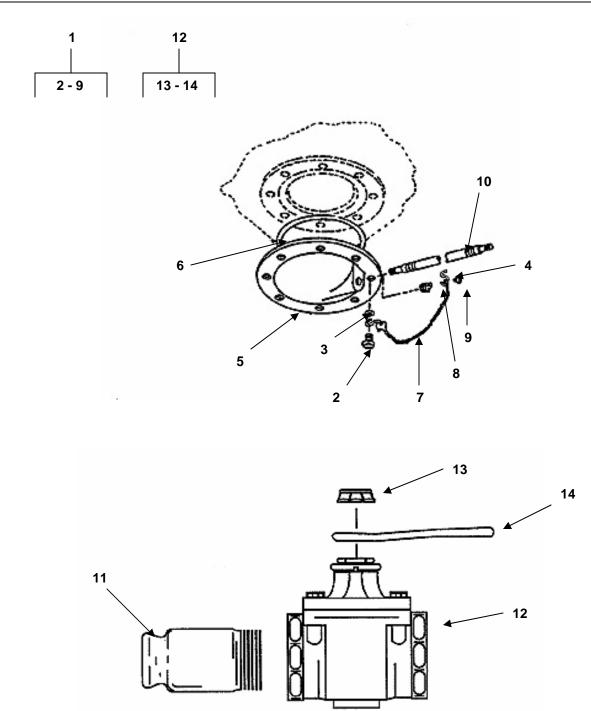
Drain Fitting Assembly and Ball Valve (Models BA91-142 and RCF0210000)
